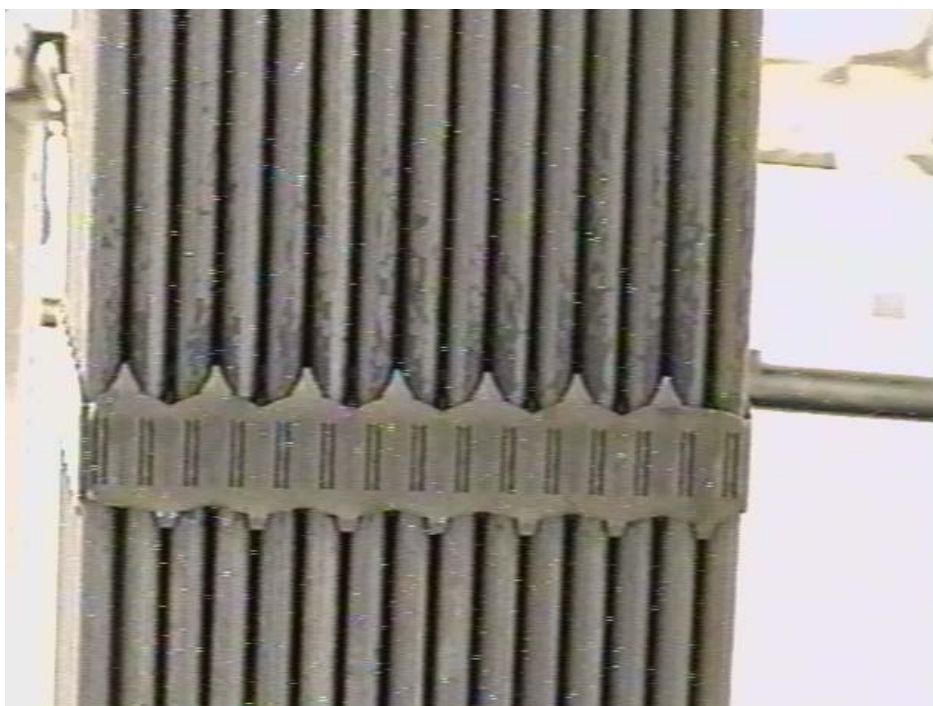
Fuel assembly V-04 mottling at fifth grid spacer.
